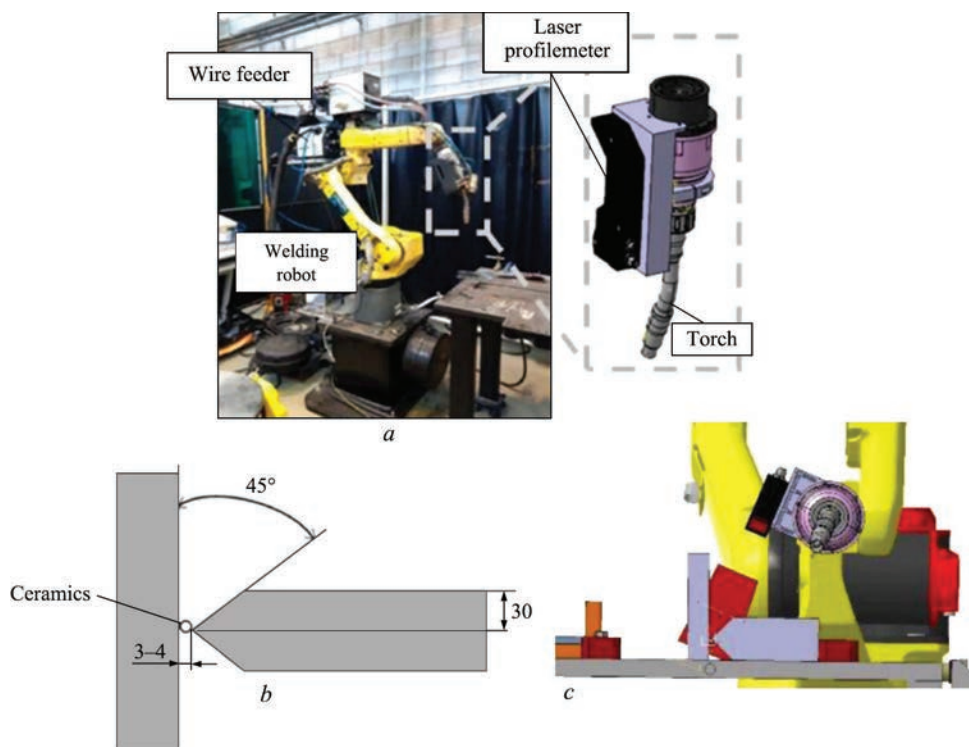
Robotic welding system (a), thick T-shaped joint (b), schematic of joint scanning using a laser profilometer (c)
